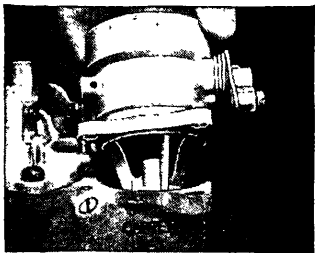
Install air horn and choke tube bracket. Use new air horn gasket in all balanced bowl vent carburetors
